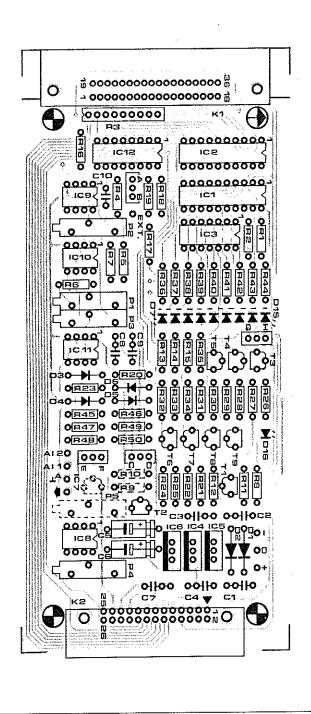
Component mounting plan of the double-sided, through-plated PCB.
